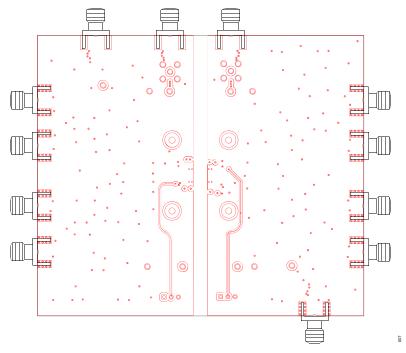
EVAL-ADN4620EBZ or EVAL-ADN4621EBZ Solder Side
